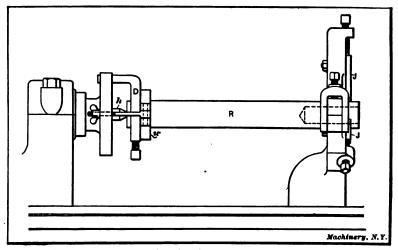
Shaft supported by Steadyrest for Drilling and Boring End
